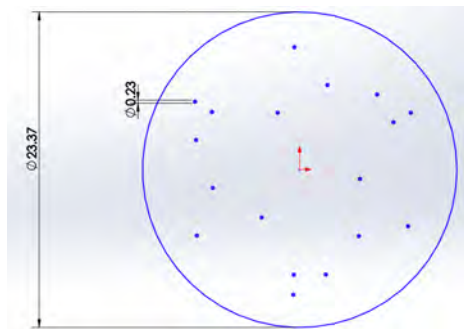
CAD drawing of the laser cut mask with 0.23mm holes 1/100th the diameter of the mask
